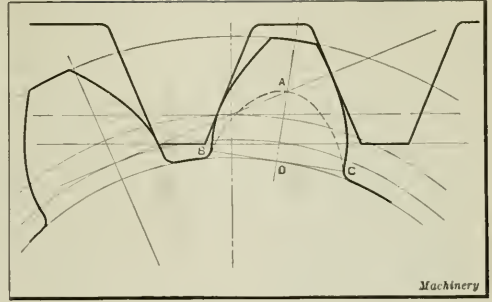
Spiral Bevel Gear of 10-47-tooth Ratio and 20-degree Pressure Angle
